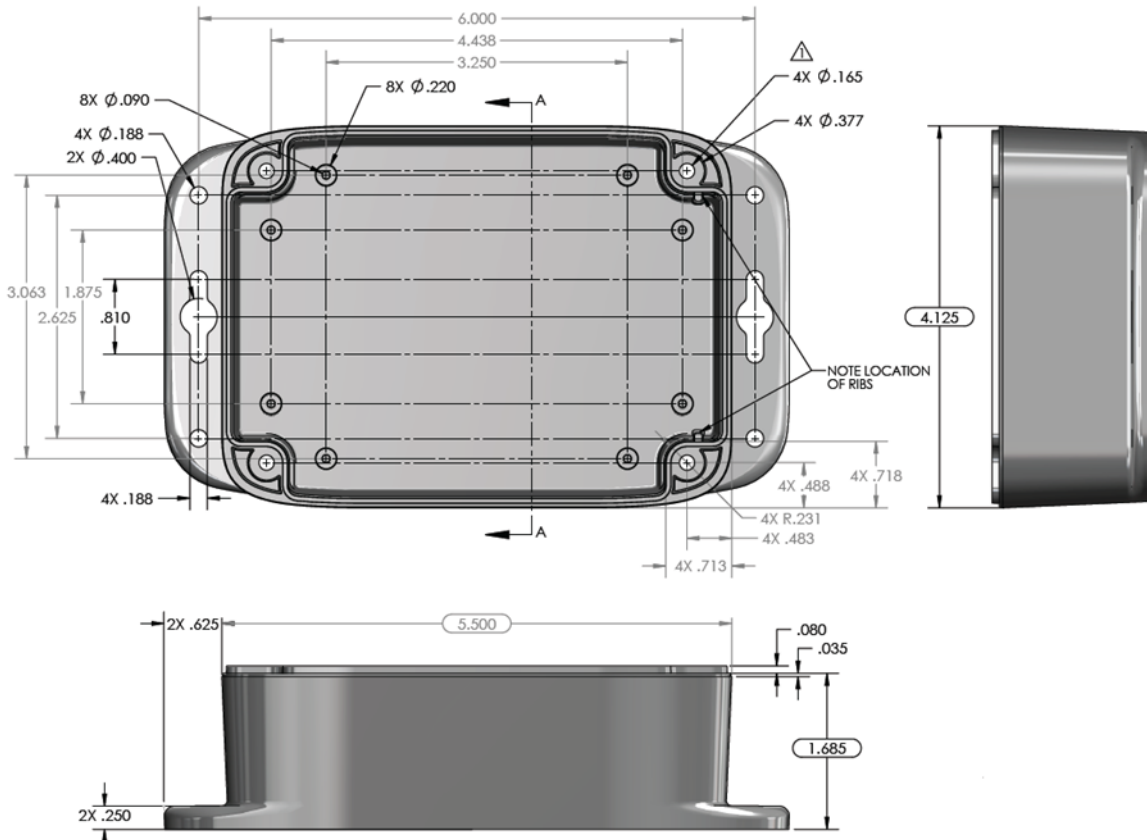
Wireless transceiver dimensions for 2D Anemometer. All dimensions are in inch.
